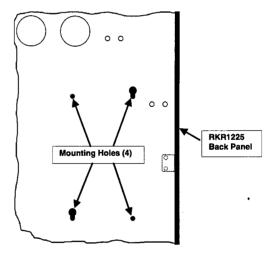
RKR1225 Battery Revert Mounting Hole Patttern (Bottom View)
